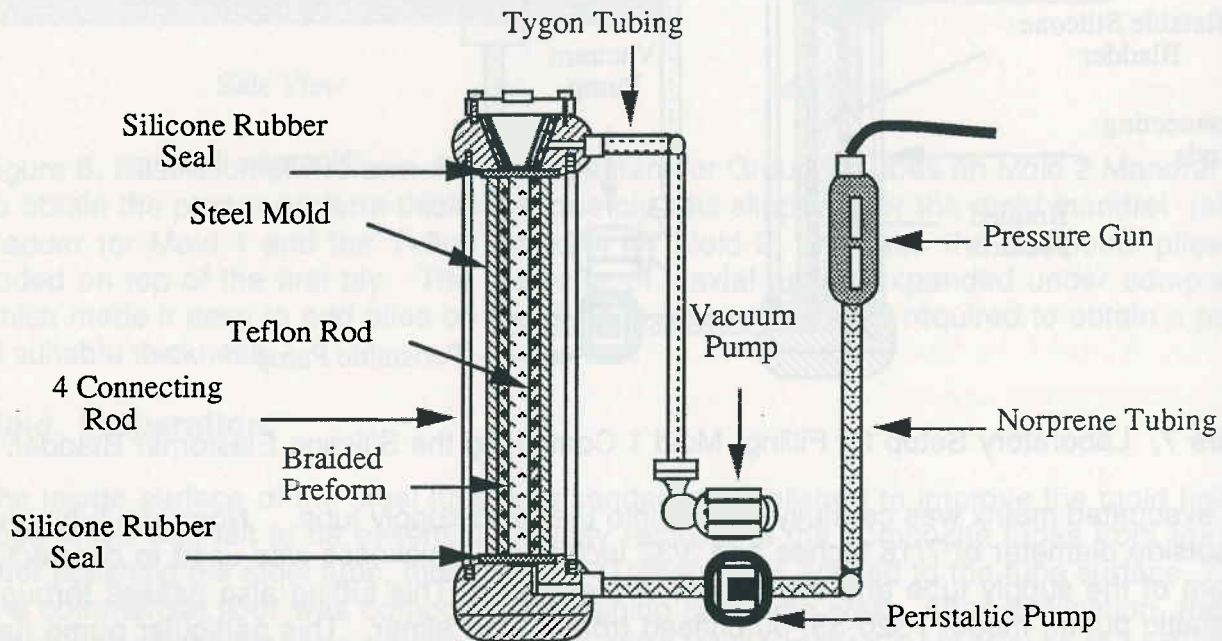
, Setup for Filling Mold 2 (Teflon Rod)
